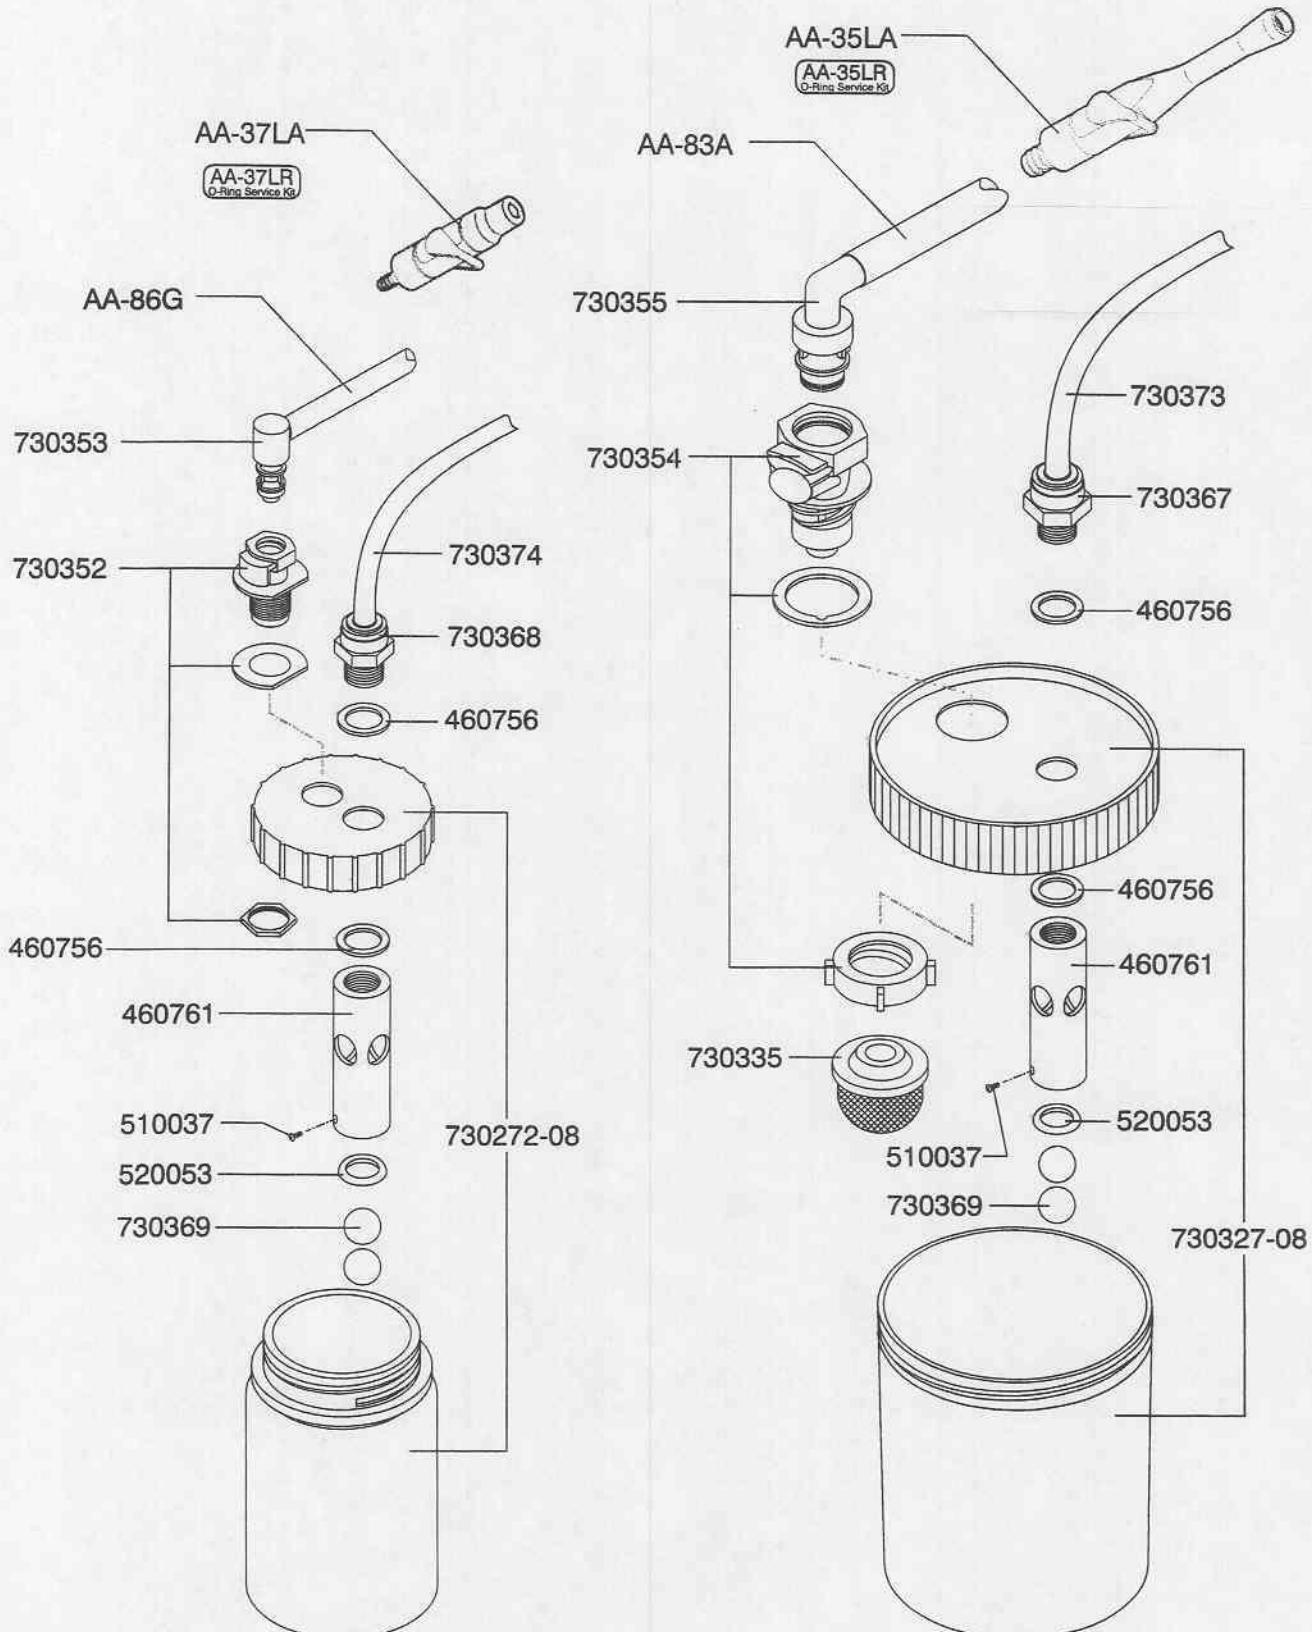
A - ILLUSTRATED PARTS LIST, HVE & SALIVA EJECTOR ASSEMBLY
